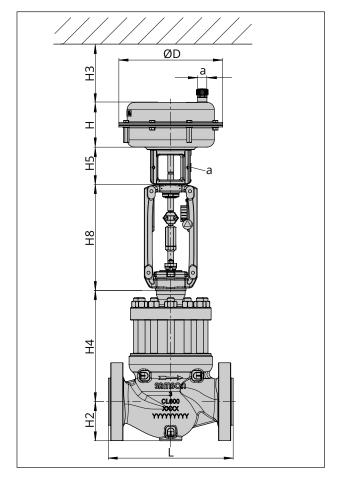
SMS HG-7 Control Valve: Type 261GR Valve with Type 3277 Pneumatic Actuator
